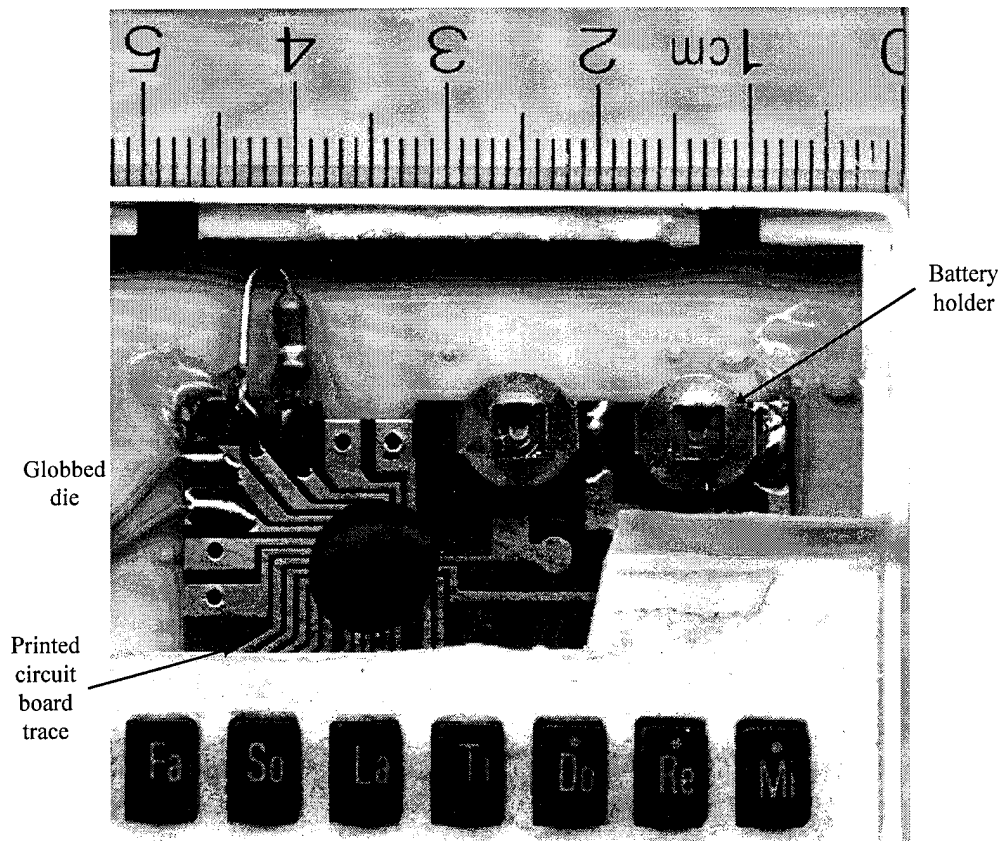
Single glob-topped die mounted directly on a printed circuit board, similar to MCM-L packaging. Die is wire-bonded directly to the printed circuit board traces and covered with a drop of black epoxy.
